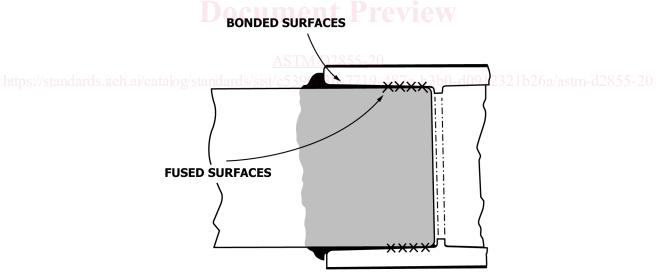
Bonded and Fused Surfaces of Joined Pipe
